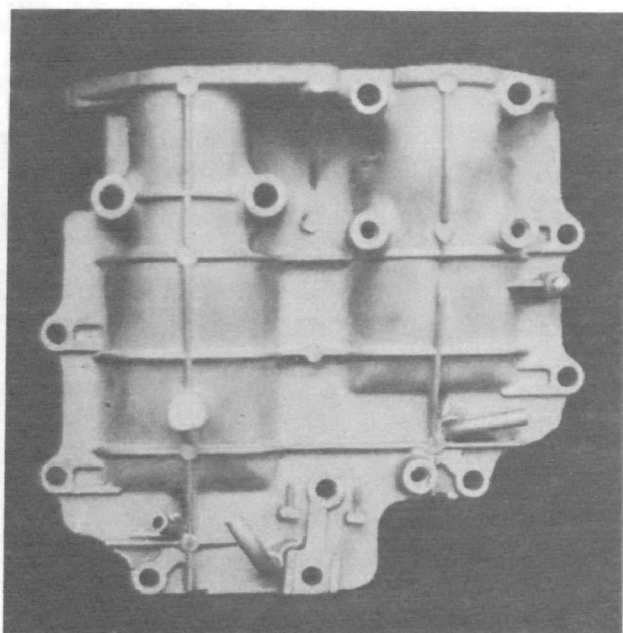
Outside of modified OMC V-4 inlet manifold, showing drain tubes (left and right), gas return tube (center), and blocked manifold pressure tap (appears white, left)
